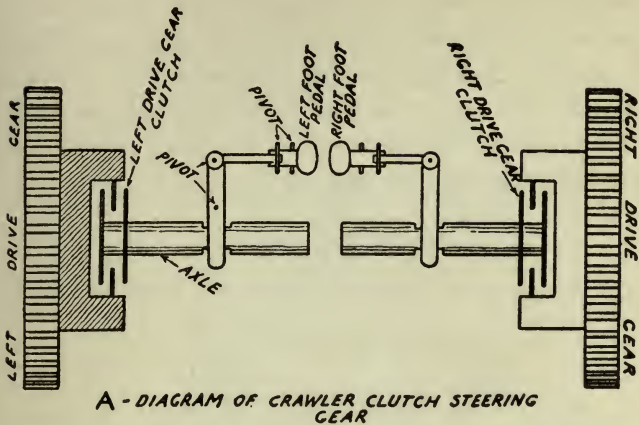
A.—How a Crawler Tractor Steering Gear Is Made and Works
